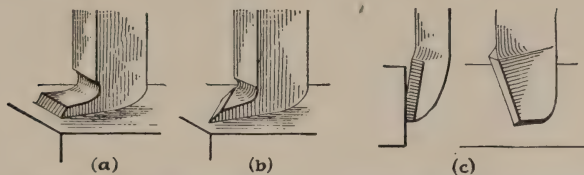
Tools for finishing cast iron. (a), Shovel-nose; (b), shovel-nose ground for shear cut; (c), front and side views of side tool.
